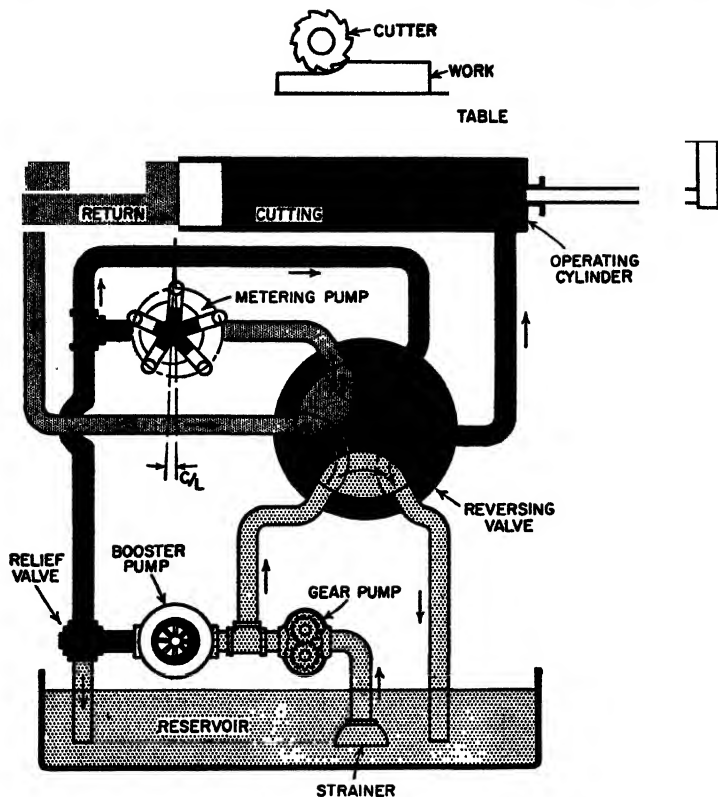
Lock-feed hydraulic system of a milling machine. (*The Socory-Vacuum Oil Company*)
